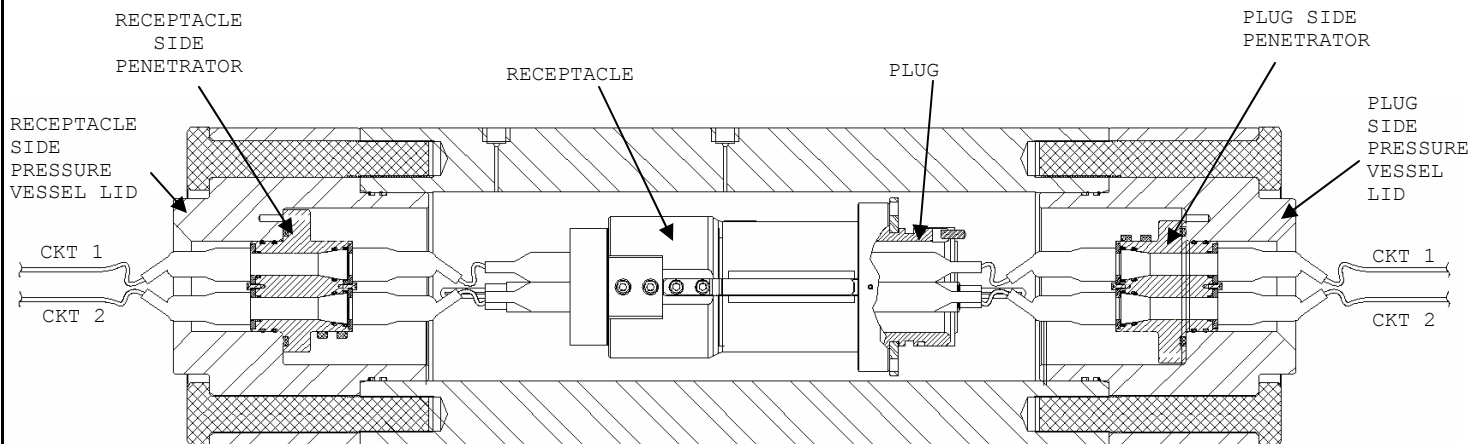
PRESSURE VESSEL TEST CONFIGURATION
